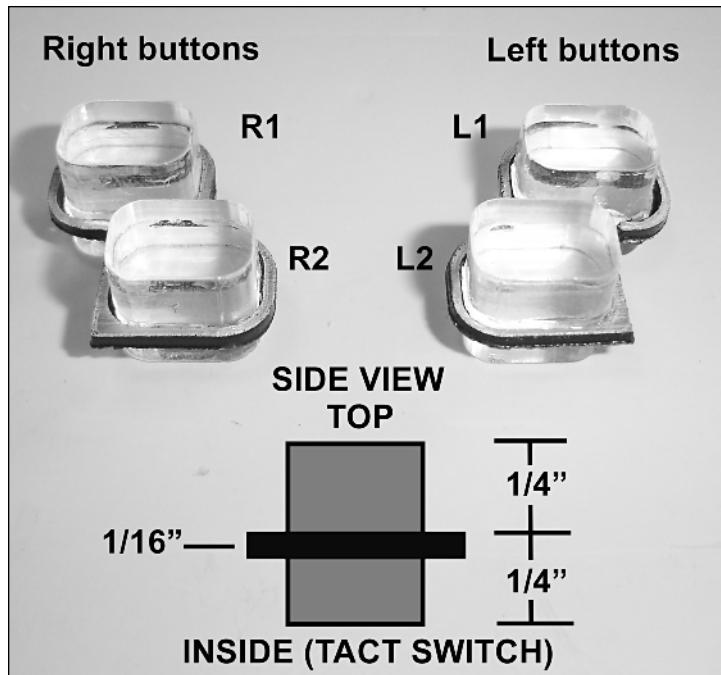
The shoulder buttons, with handy cross-section drawing.
